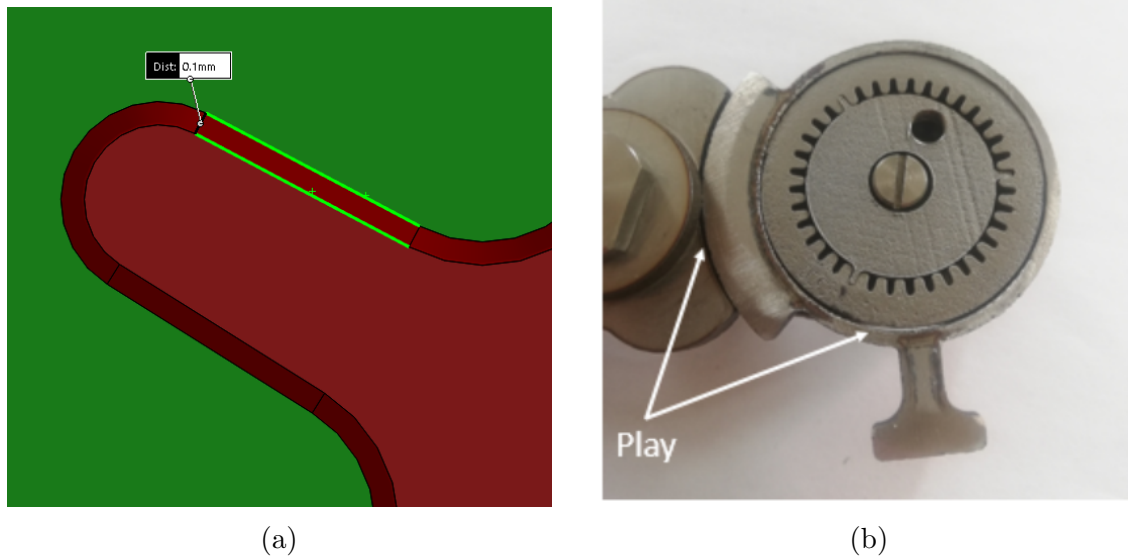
Tolerances and play in the design. (a) Leaving a 0.1 mm gap between the gear teeth (red part) and the housing (green part) in the model made the parts fit together after fabrication. (b) Undesired play between locking ring and adjacent components due to making the wrong trade-off between fabrication error and designing for the right fit.
